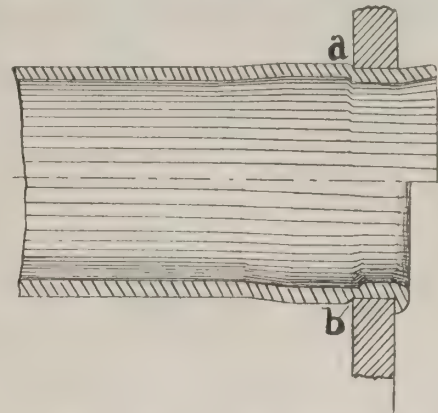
A TUBE DAMAGED IN EXPANDING.
